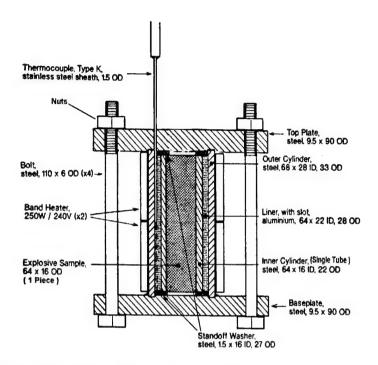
Super Small-scale Cook-off Bomb Test Assembly
